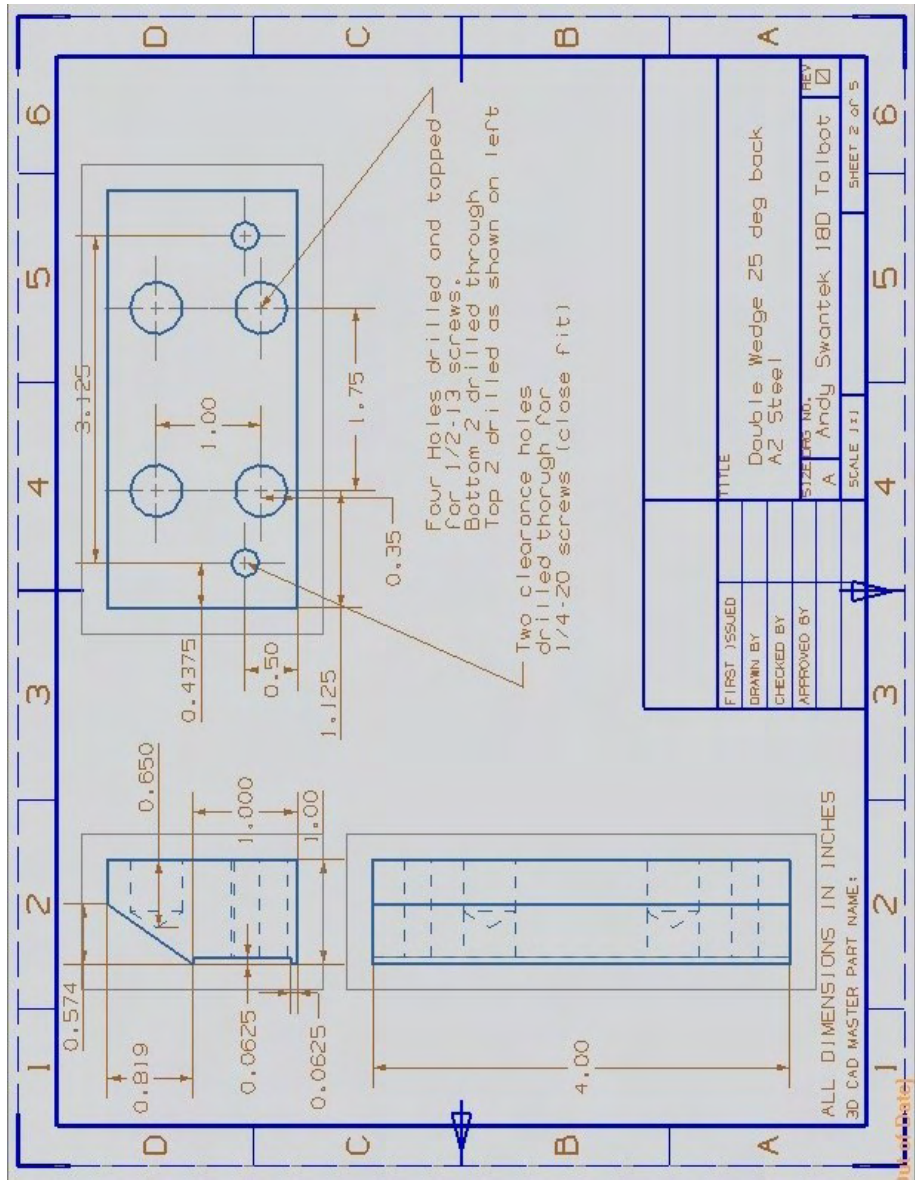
Machine drawings for the aft piece of the double wedge model.
